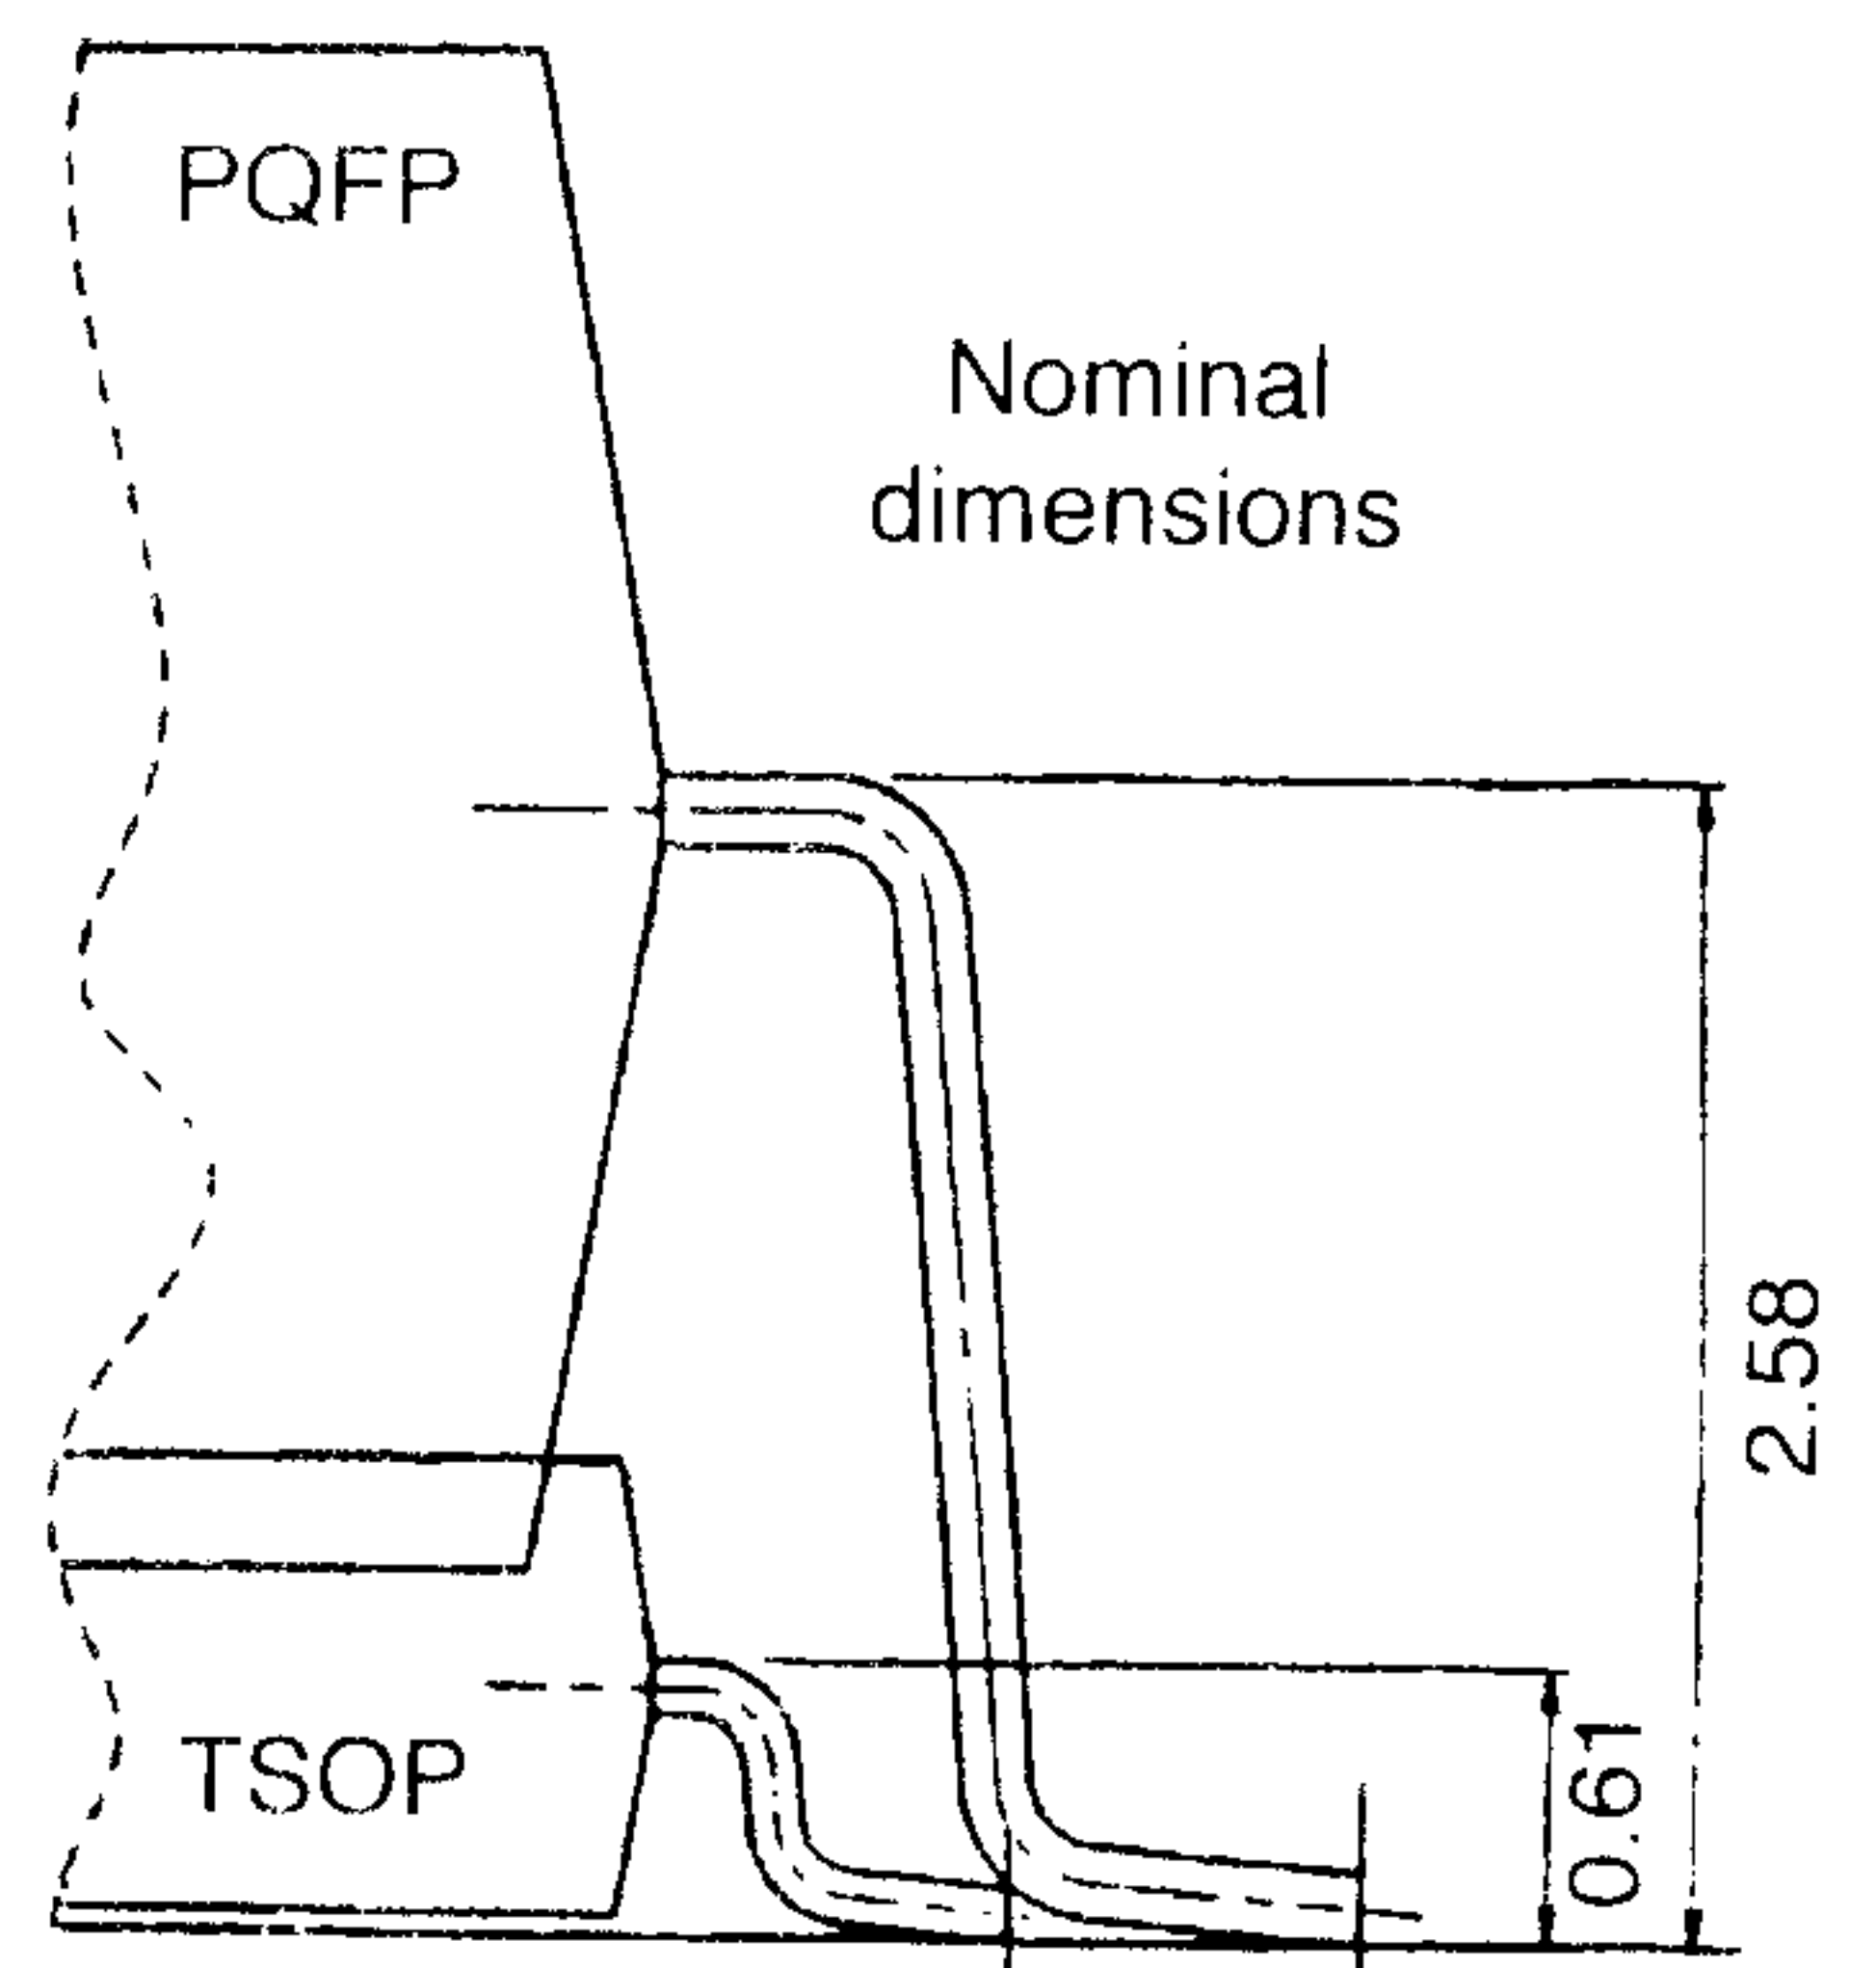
Height reduction achieved in the dimension above a circuit board by using TSOP chip carriers instead of PQFP chip carriers.
